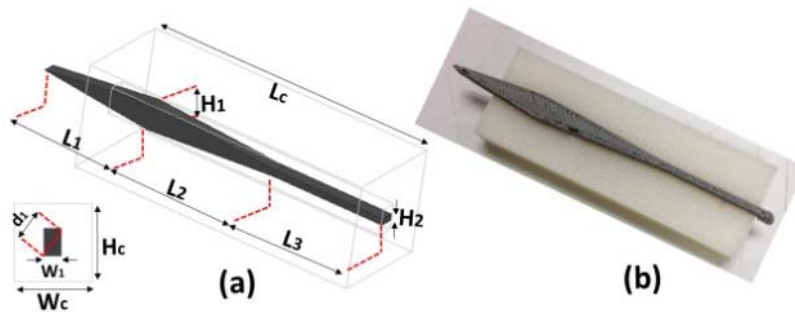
Antenna physical geometry and dimensions (a), and fabricated prototype (b).
